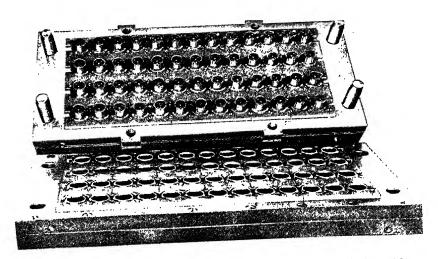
Semipositive mold of built-up construction, consisting of heater plates and hobbed dies. Dies are replaceable and may be removed in twos or threes without dismantling entire mold. Mold (15 by 31 in.) requires press mounting for operation. Where molds are continually heated, indirect heating, as here applied, is practically equivalent to direct heating.
